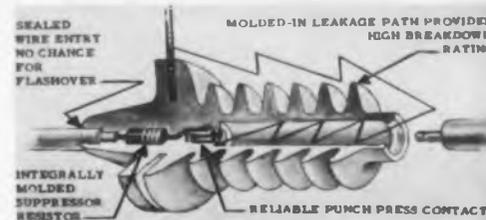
Compact Connector Tames 30 KVDC and Provides Unique Circuitry Advantage with Integral Molded Surge Suppressing Resistor.
